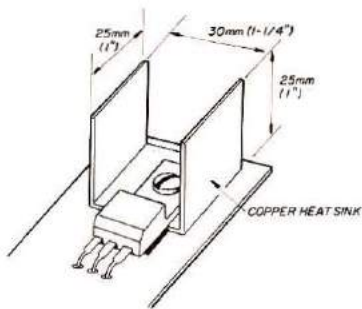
A copper heatsink is necessary for the regulator IC in the power supply. You can easily make one from a piece of copper, bent as shown here. This mounts on the component side of the board.
